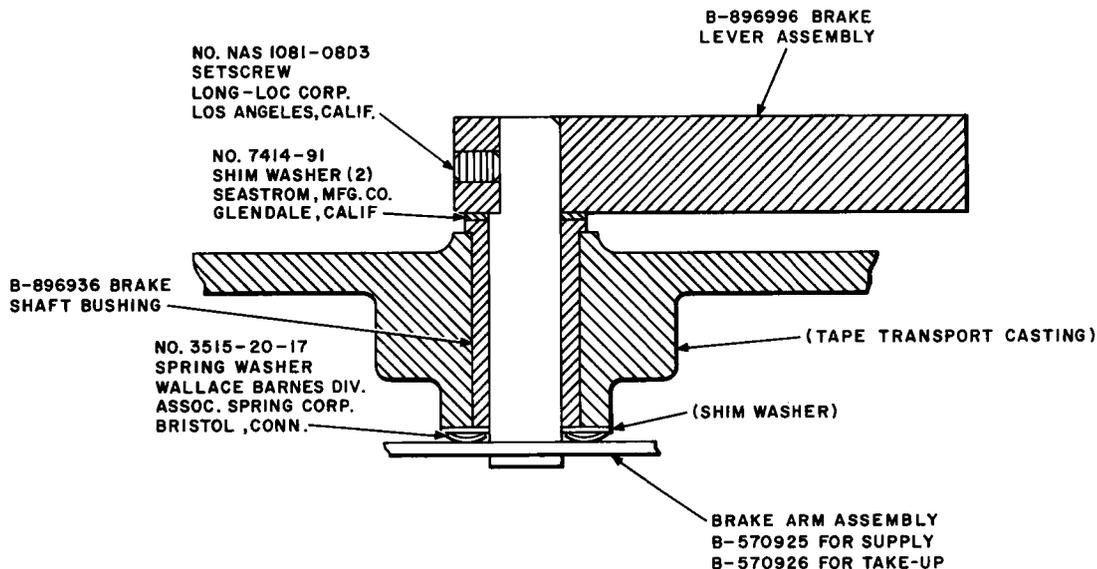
Sectional View of Supply or Take-Up Reel Brake Assembly
